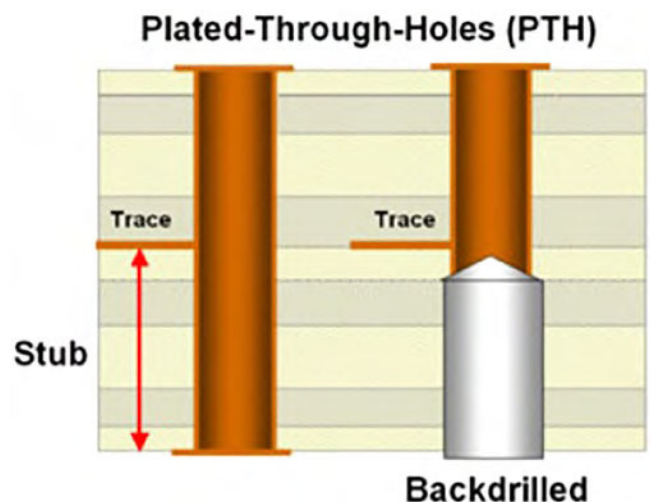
Check for backdrill depth tolerance so that the backdrill does not penetrate, or partially penetrate, the stop layer.
